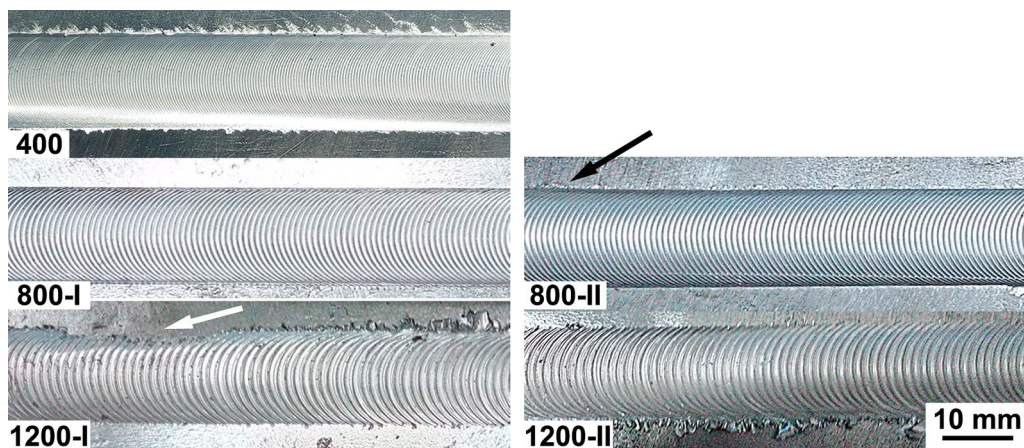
Surface of the FSW joints at various welding speeds and various plunge depths
